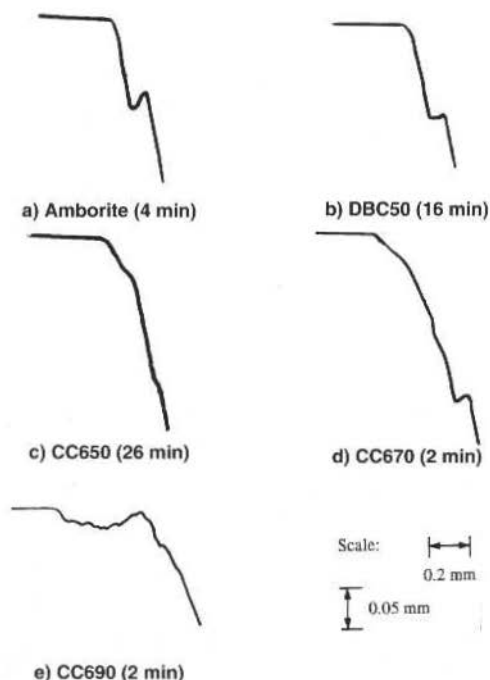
Profile of the rake and flank faces after finish turning ($v_c=200$ m/min, $f=0.06$ mm/rev and $a_p=0.5$ mm) hardened AISI E52100 steel with: a) Amborite, b) DBC50, c) CC650, d) CC670 and CC690.
